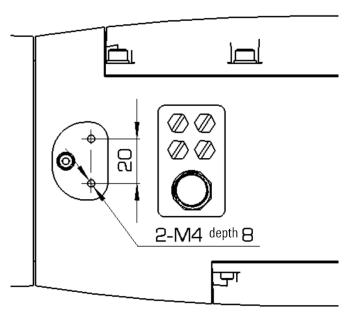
Dimension drawing of AIR8-710B type manipulator forearm interface
